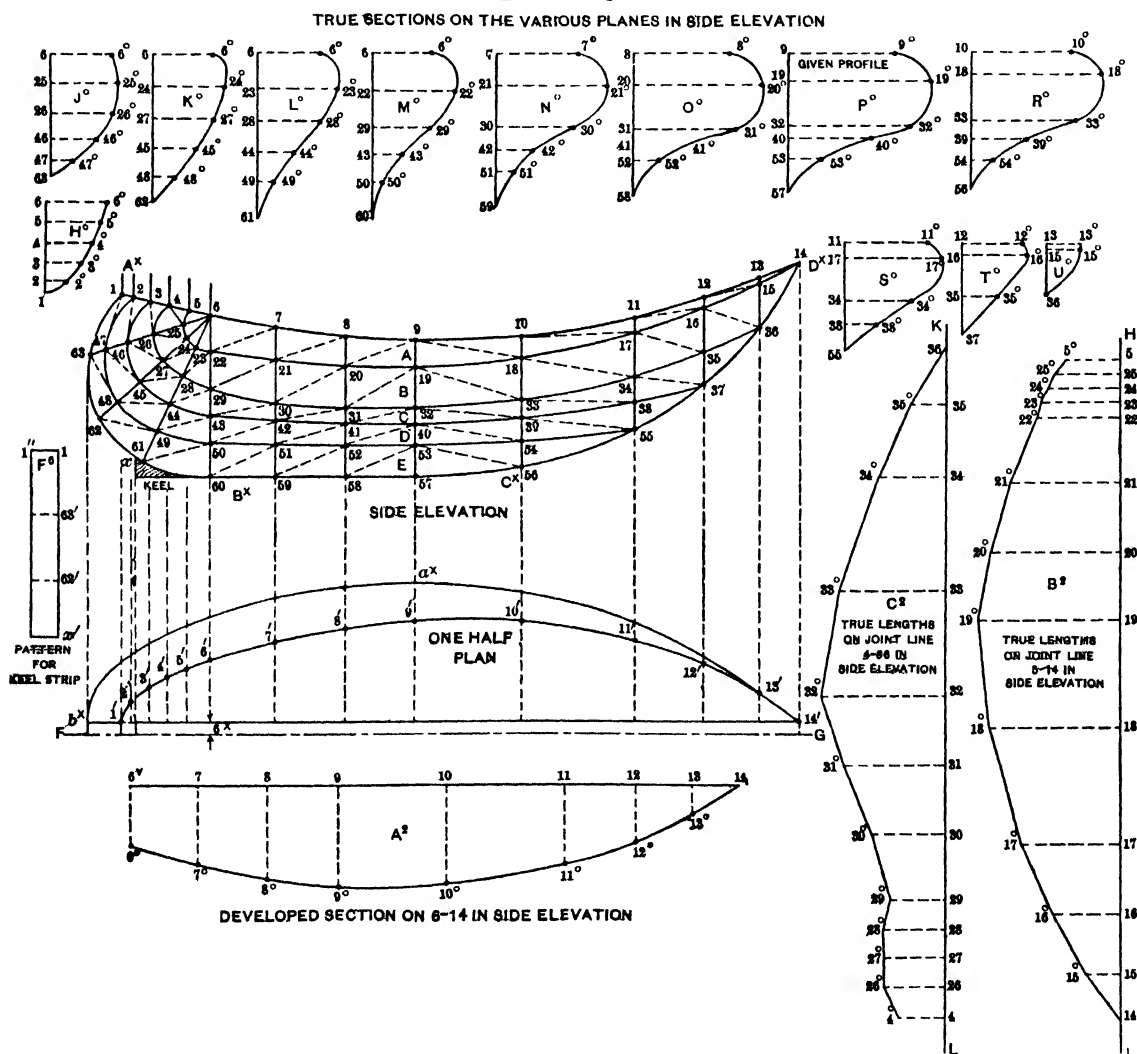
Plan, Elevation, Sections and True Lengths of Sheet Metal Boats
